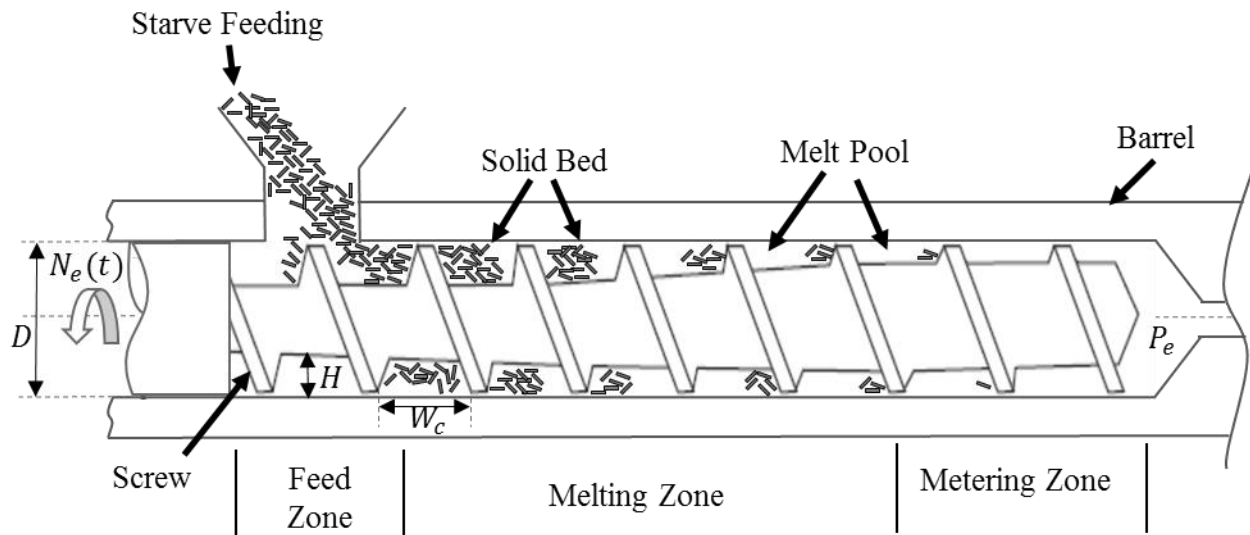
Schematic of the single-screw extruder used in CAMRI.
